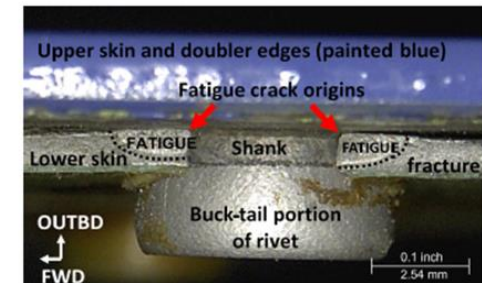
Lower skin fracture face showing fatigue cracks (outlined by dashed lines) that emanated from the rivet hole
